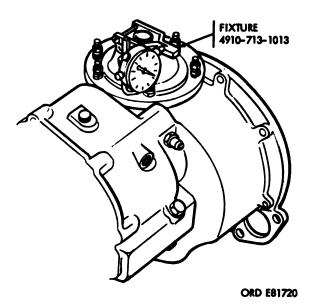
Backlash setting fixture—4910-713-1013 installed on transmission housing.
